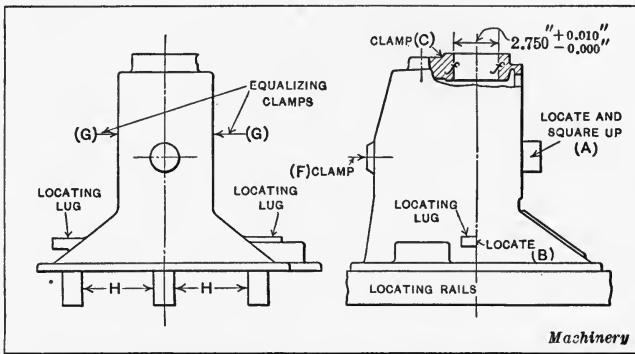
Operation Drawing for drilling Main Bearing Hole in Small End
